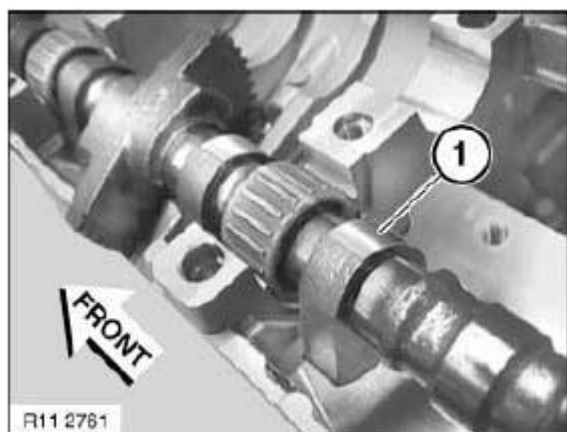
Identifying Machined Curvature Of Eccentric Points
